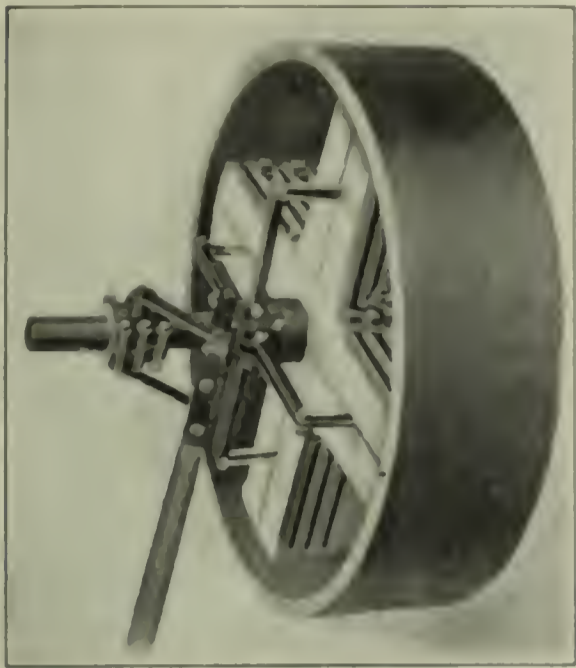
RECESS CLUTCH AND PULLEY-SHIFTING MECHANISM
